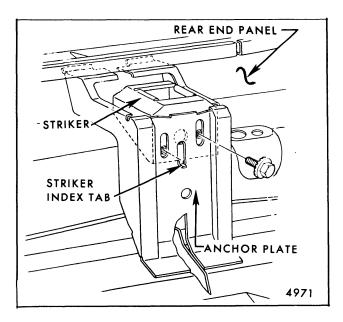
Typical Rear Compartment Lock Striker Mounted in Rear End Panel
